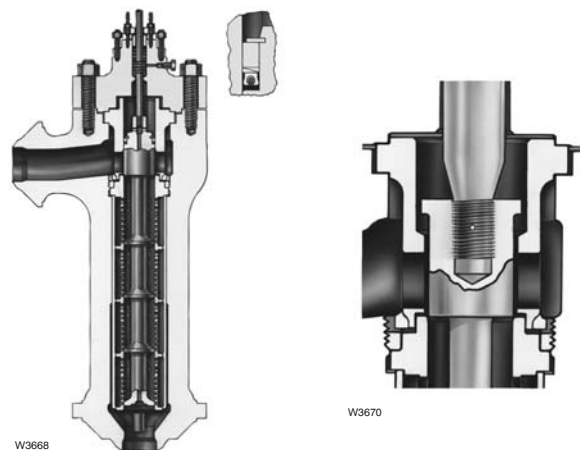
B-33. Stem-balanced Design CAV4 with Cavitol IV trim
